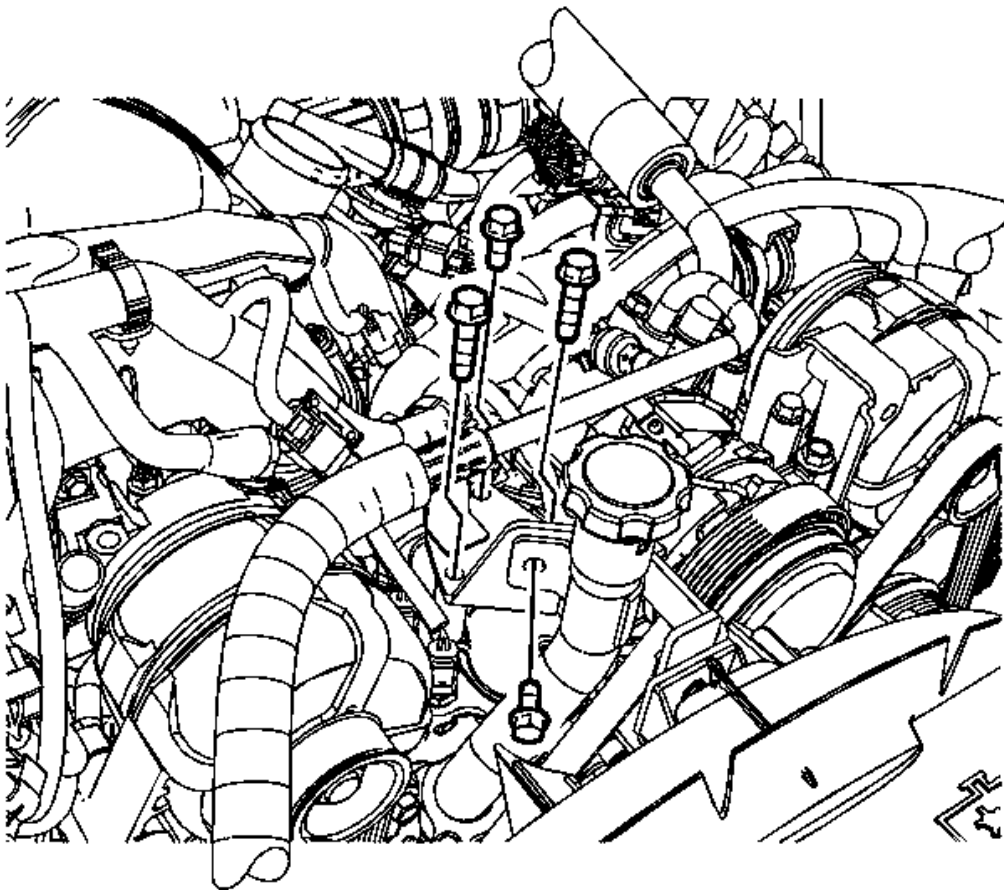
View Of (ECT) Sensor Electrical Connectors
